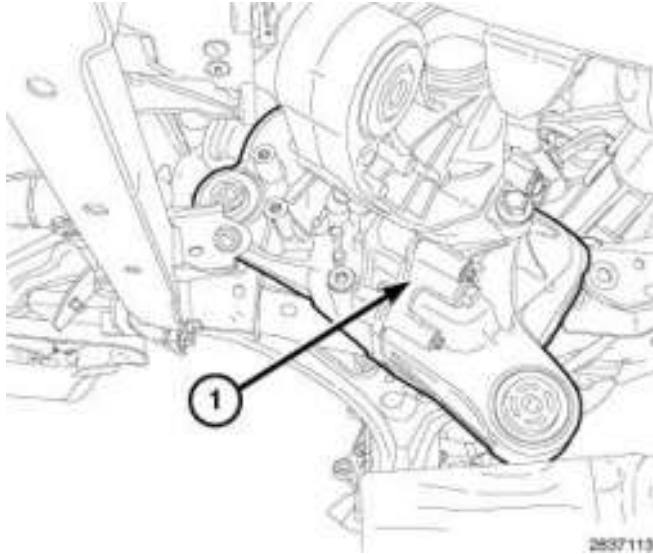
Front Axle Tube Bushing Mounting Bolt Nut, And RH Axle Bracket
